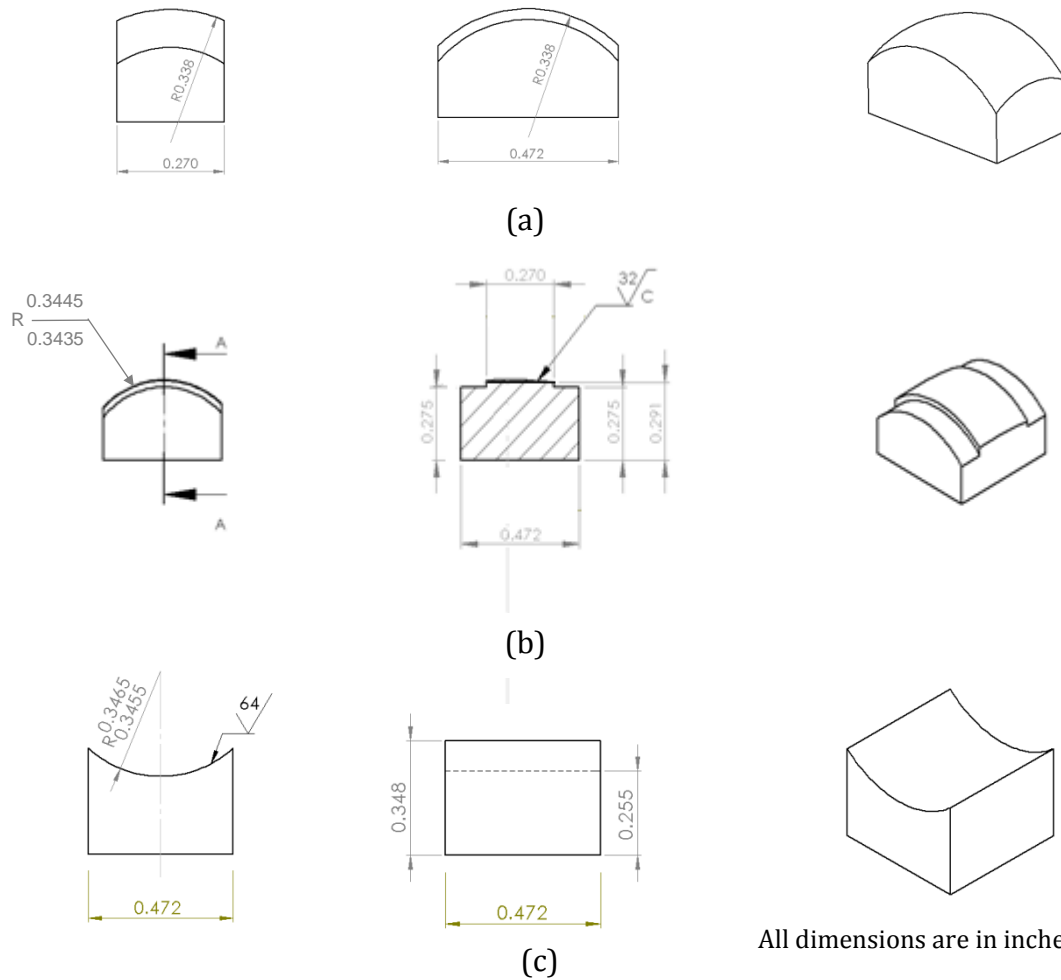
Working drawings of the fretting specimens (a) upper fixed cylinder sample (G1), (b) upper fixed cylinder sample (G2) and (c) lower oscillatory ring sample.
